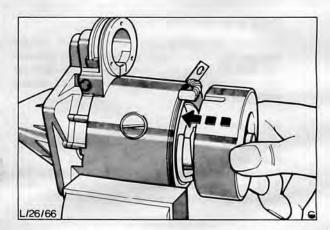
Guide rubber insulator into cut-out in commutator end housing
